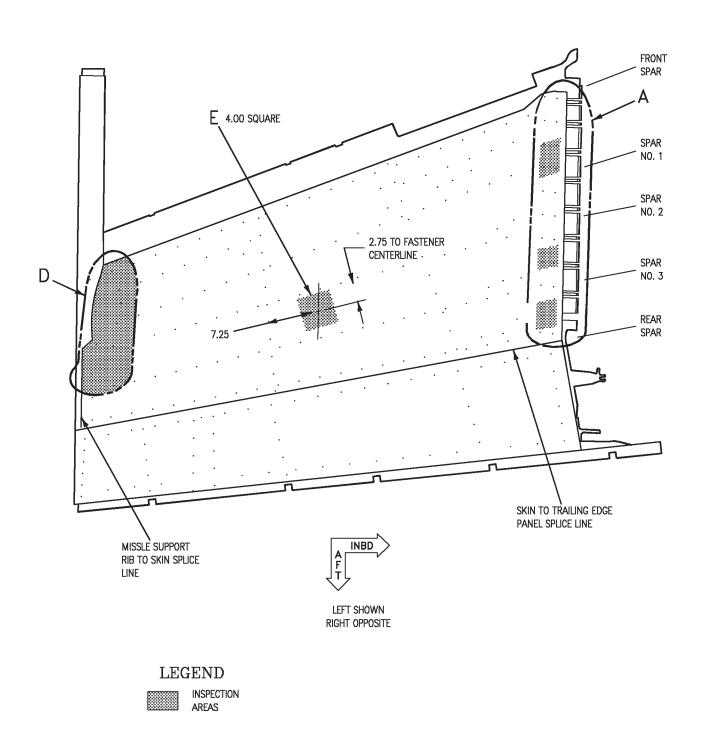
Outer Wing Upper Surface Inspection Areas (Sheet 1)
